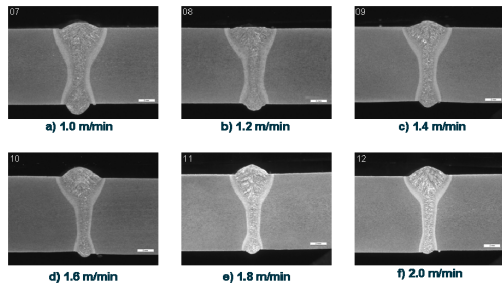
Welding of 9.5 mm thick X65 plate material with solid wire
